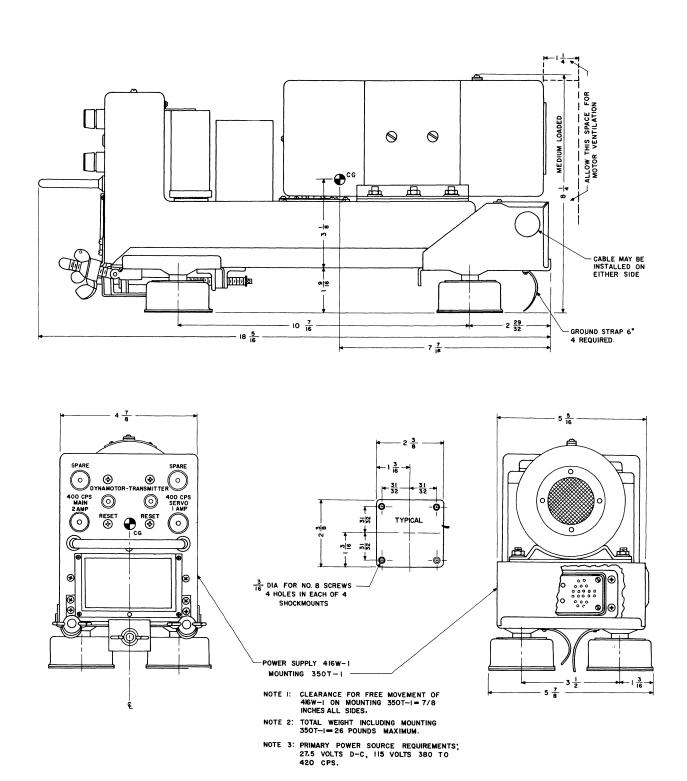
Power Supply 416W-1, Outline and Mounting Dimensions
